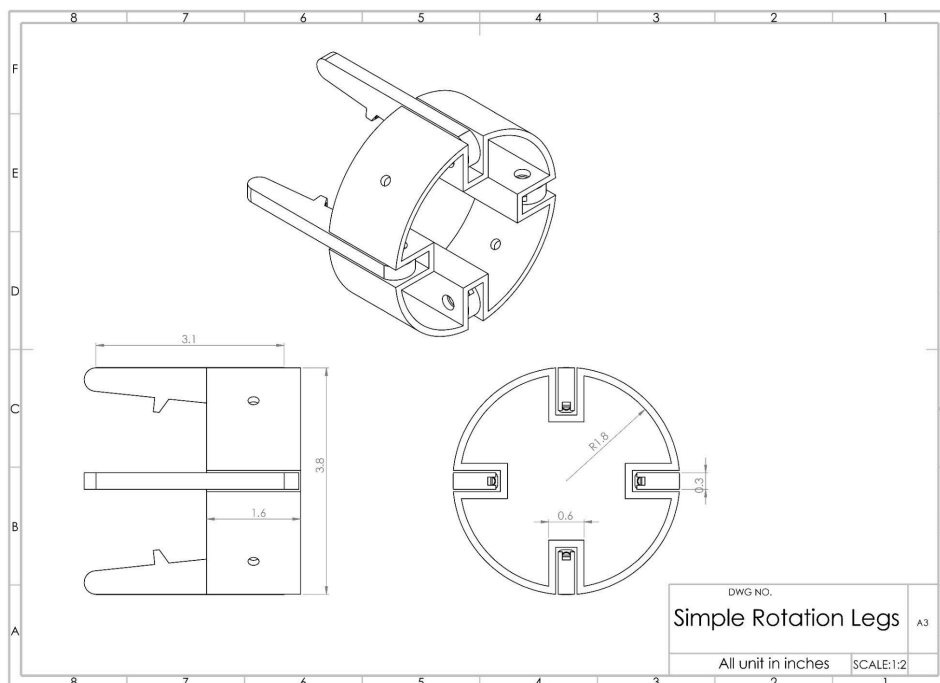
Simple Rotation Legs Dimensional Drawing
